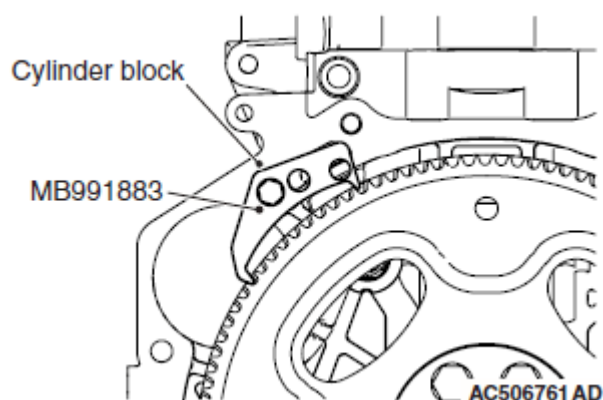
Fixing Flywheel Assembly Using Special Tool MB991883
